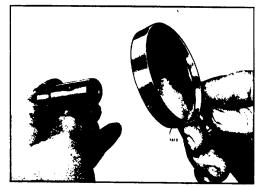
Examing Sealing Surface with a Magnifying Glass
